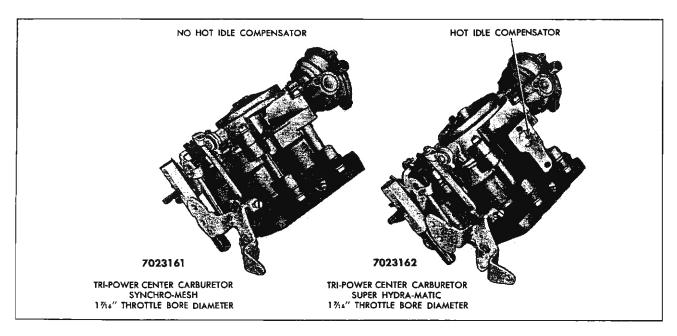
Comparison of Carburetors 7023161 and 7023162 Showing Hot Idle Compensator. Neither is Equipped with Throttle Return Check.
